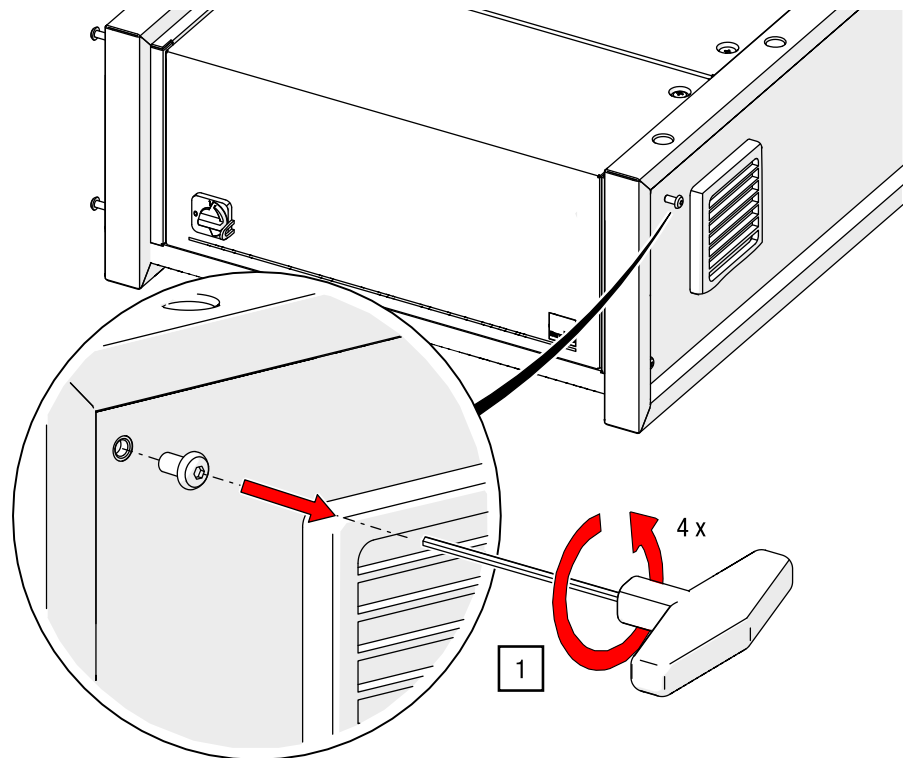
G-FRAME control unit Screws for. Loosen mounting bracket screws (control unit model may differ)
